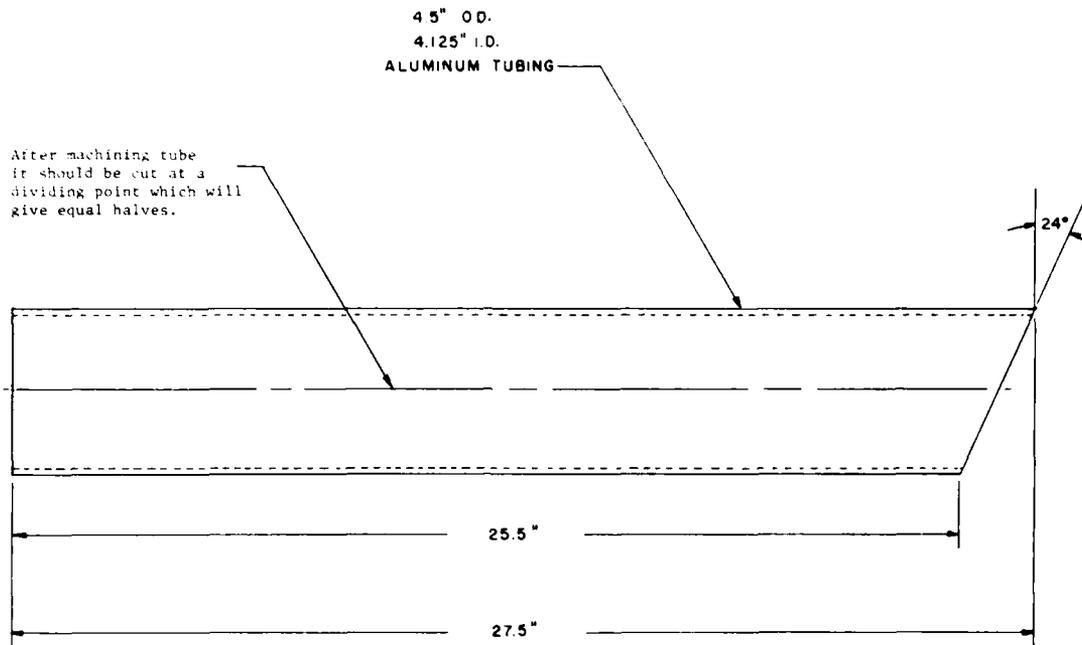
Light-trap dimensions and assembly, unless otherwise specified, tolerances are  $\pm .002$
